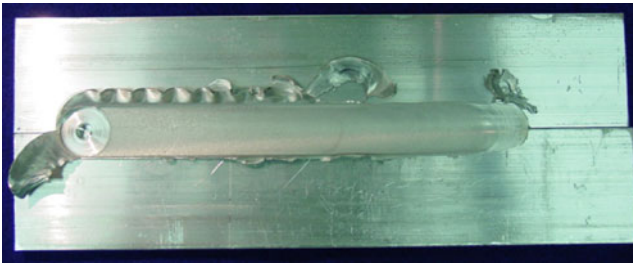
Weld sample with 1 mm ramp and no torque control
